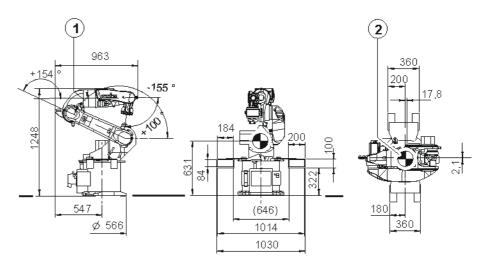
Transport dimensions, floor-mounted robot KR 16 arc HW
